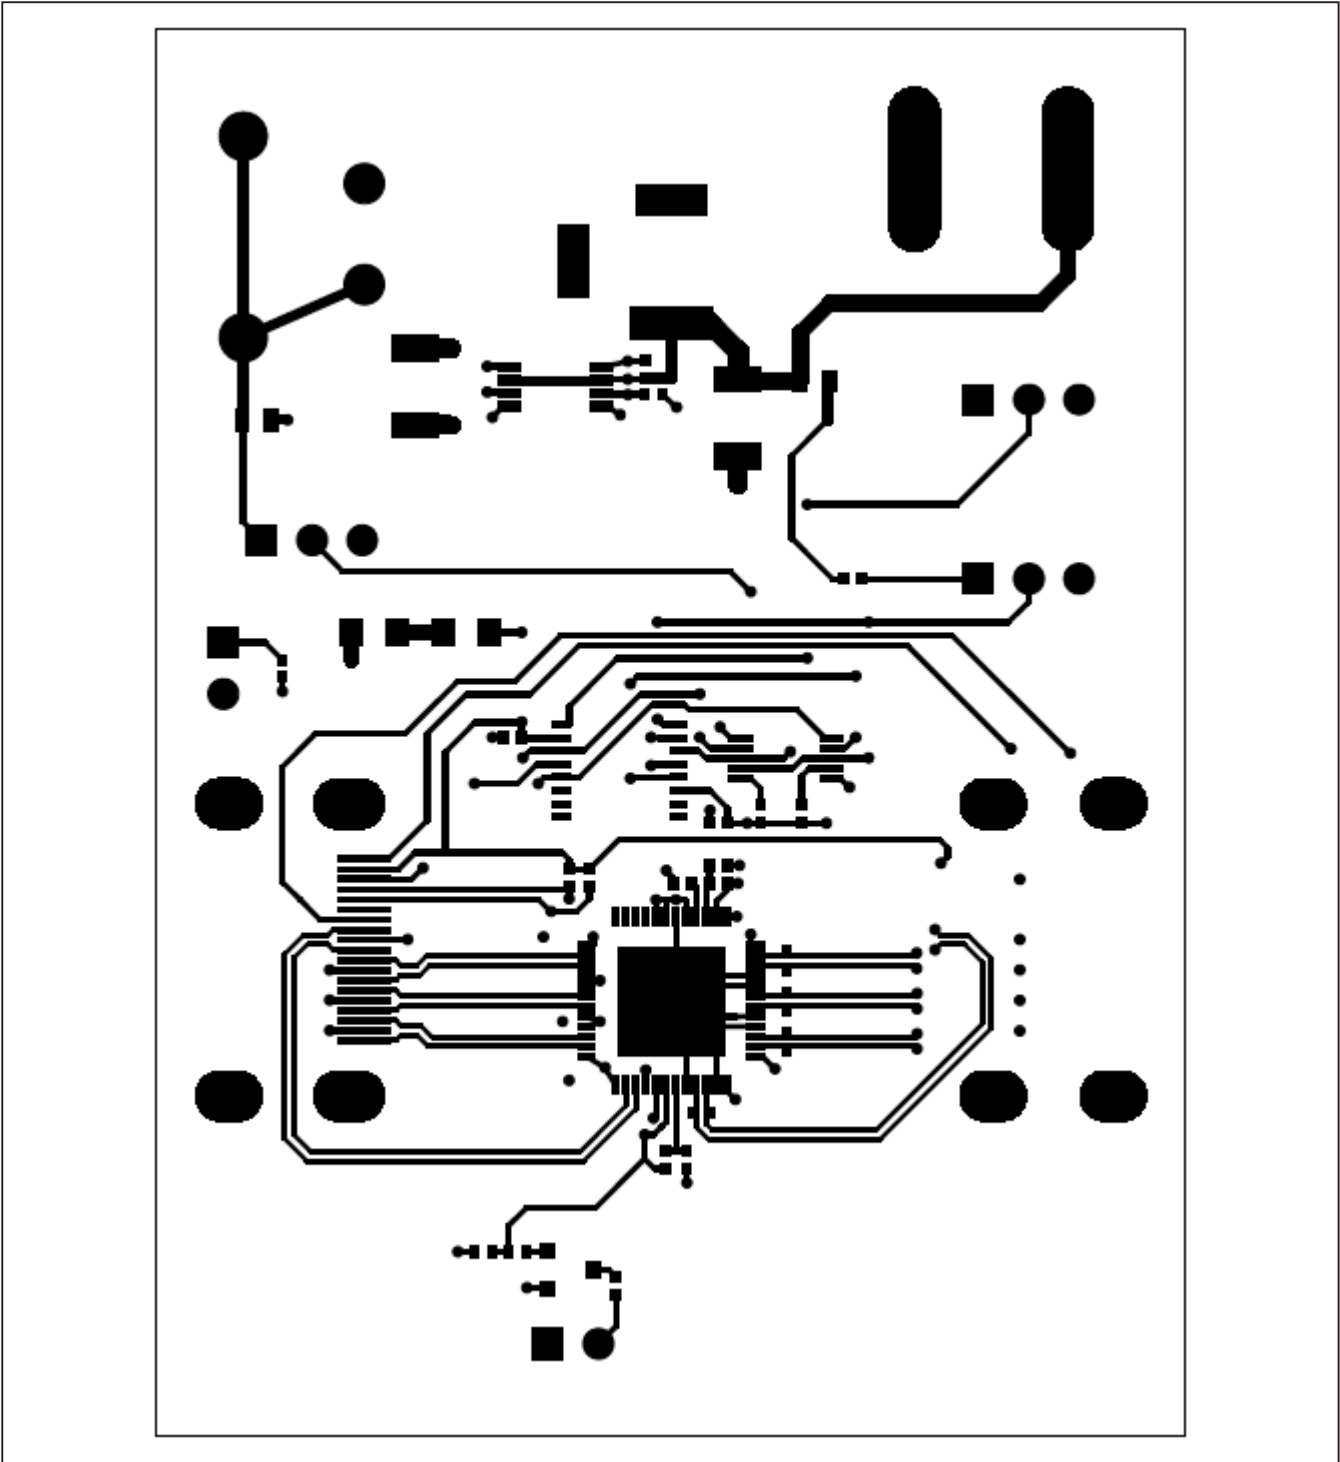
MAX3815A EV Kit PCB Layout—Top Side
